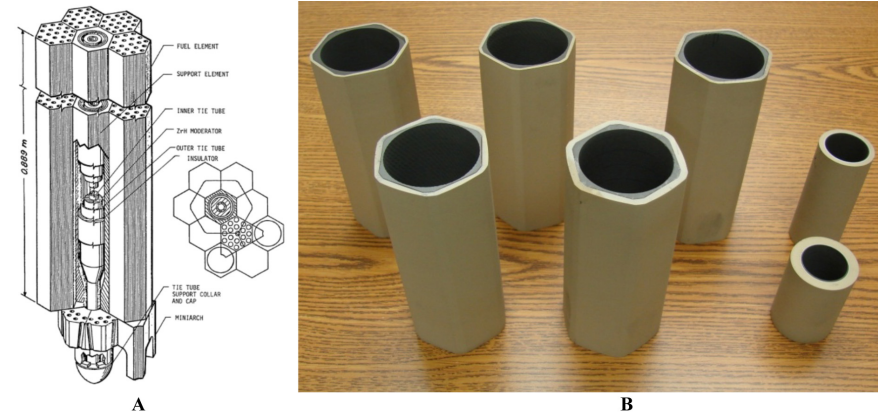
A) Schematic showing NTP tie-tube surrounded by nuclear fuel rods. B) TaC hexagonal and cylindrical tubes produced by Vacuum Plasma Spray (VPS) forming.
